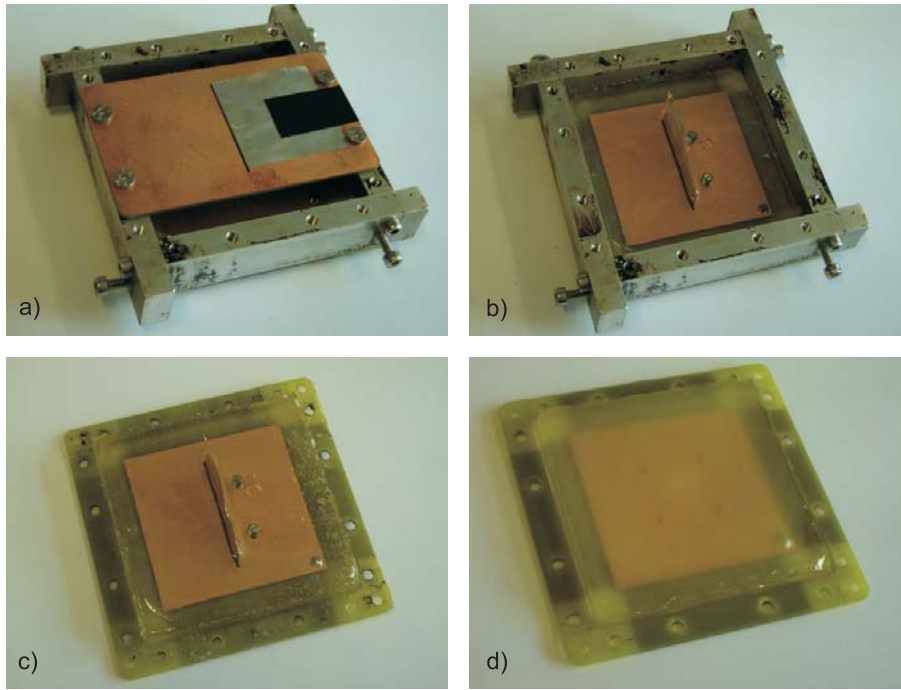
Resin casting of embedded electrodes. (a) Mold with a clamped aluminum foil, (b) mold after filling with liquid epoxy resin and hardening, (c) the electrode after removing of the mold. (d) Electrode array after milling and polishing of the surface (an array of fine gold wires and four stronger copper wires instead of a metal foil are used in this photograph).
